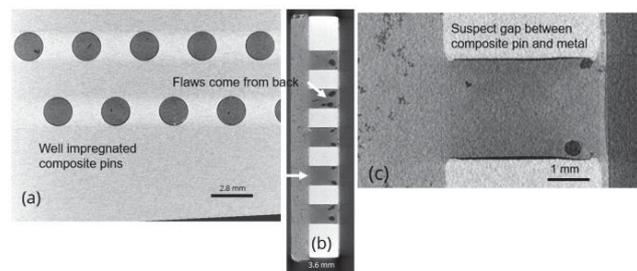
X-ray scanning of hybrid joints before testing at (a) front view, (b) side view and (c) typical inter-locking hole.
